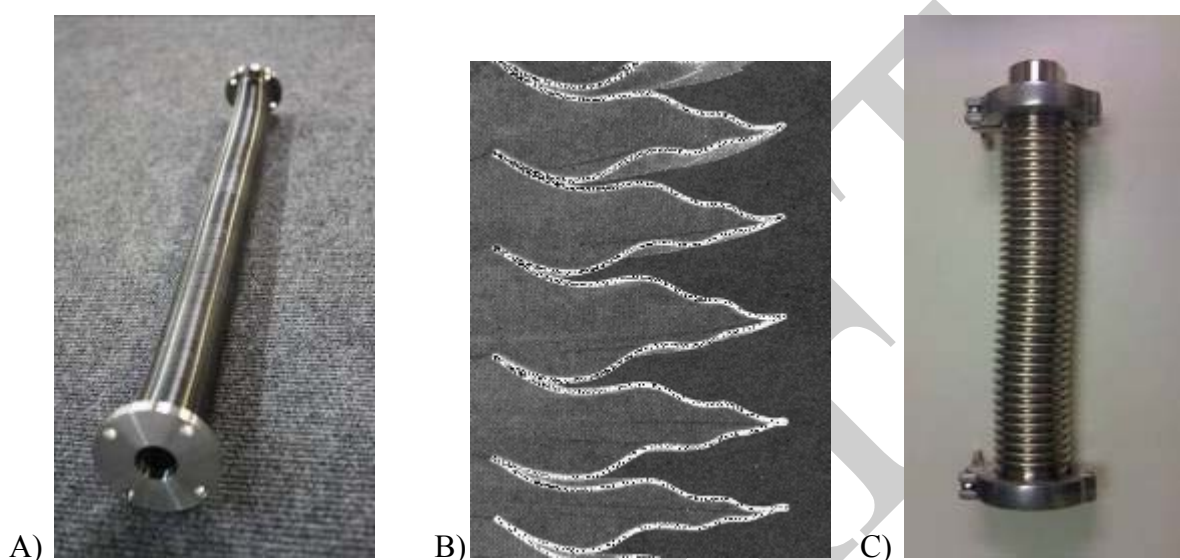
A) Edge-welded bellow B) detail cross section of edge-welded below C) hydro-formed bellow.
